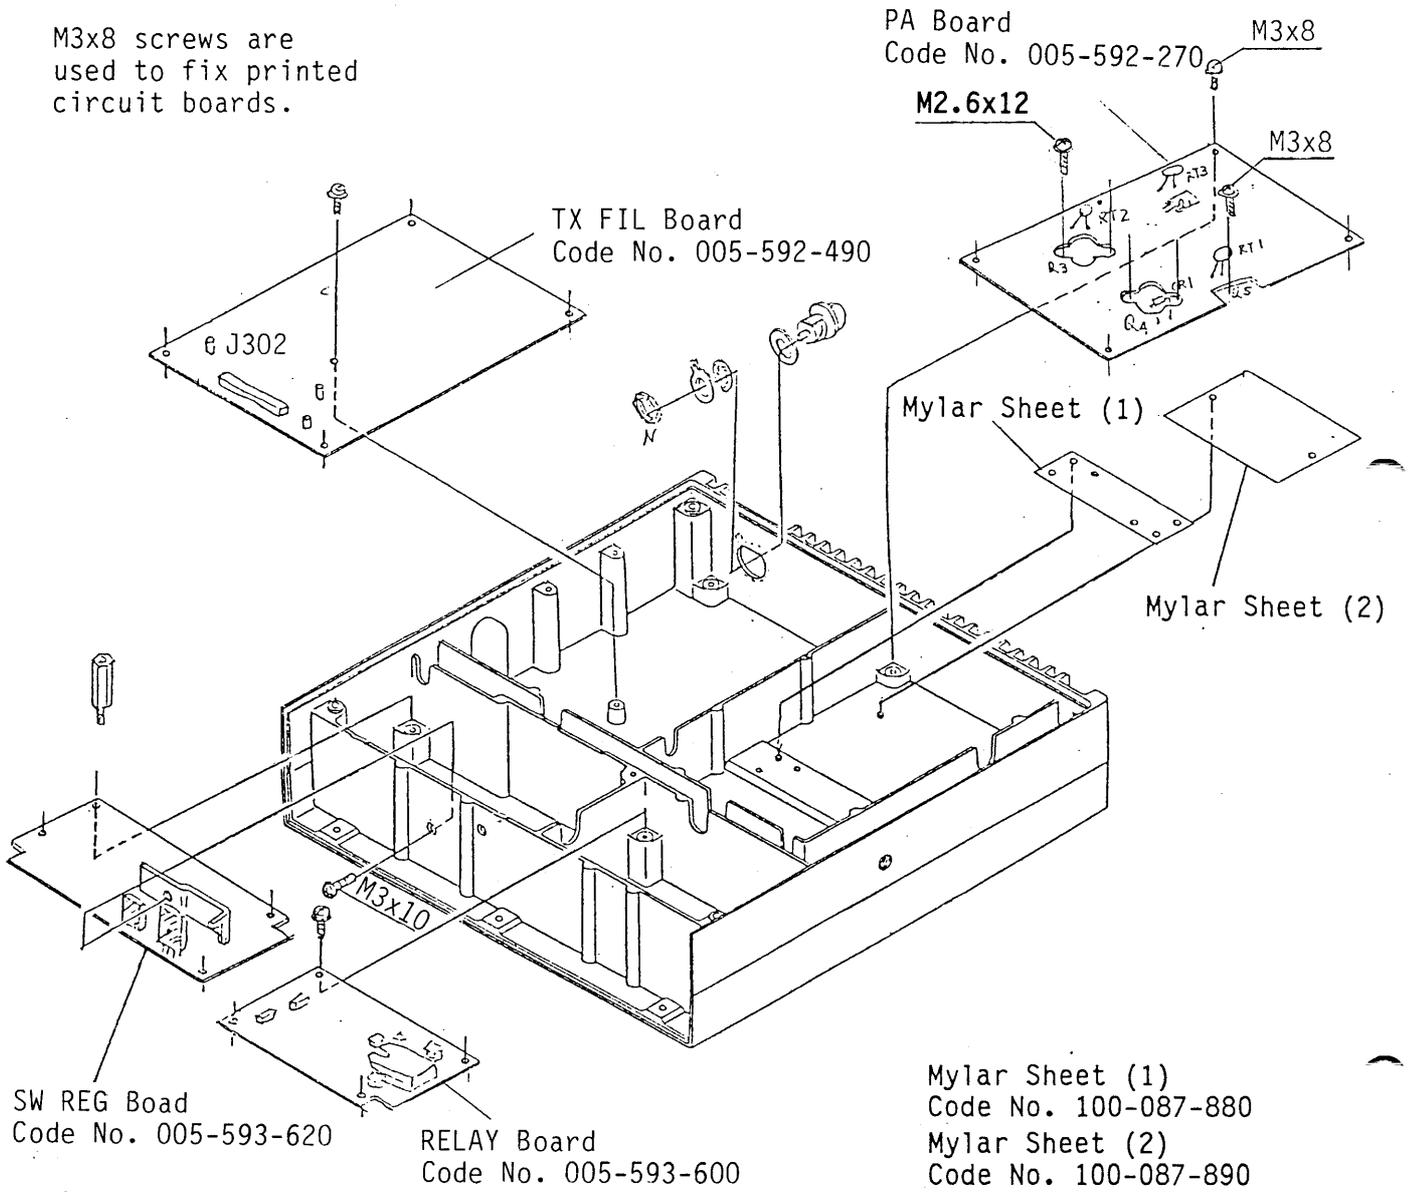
Disassembly of P.C. Boards from Top Chassis
